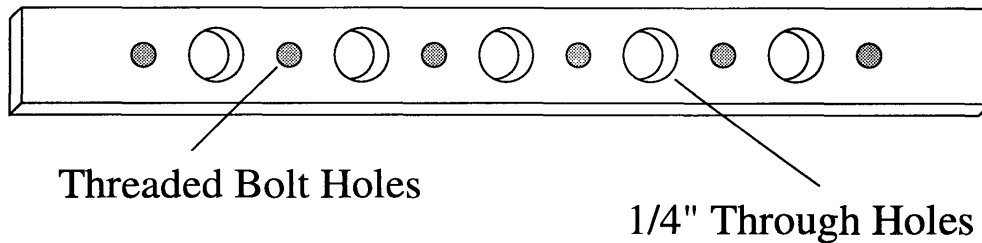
Aluminum Strips for Arranging and Holding Pressure Probes onto the Experimental Plate
